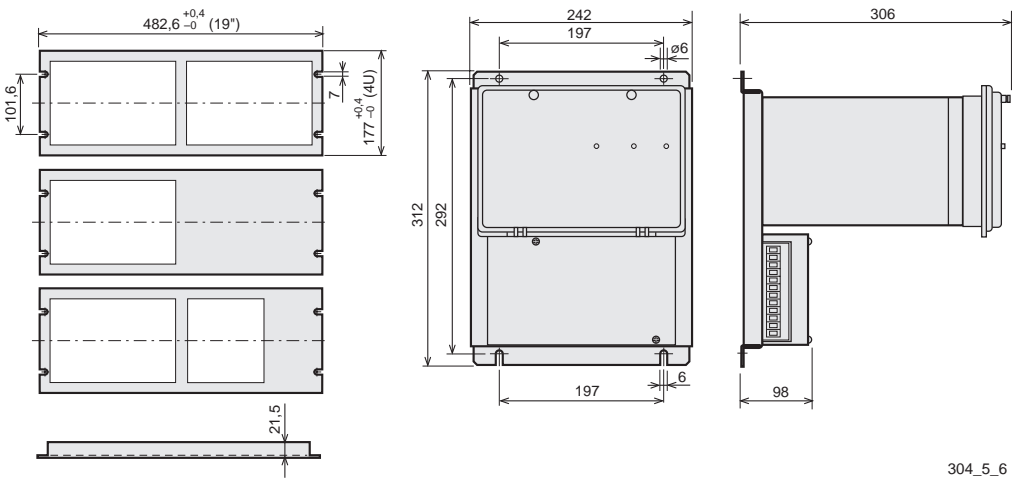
Mounting cabinets and frames as well as projecting mounting (dimensions in mm)
